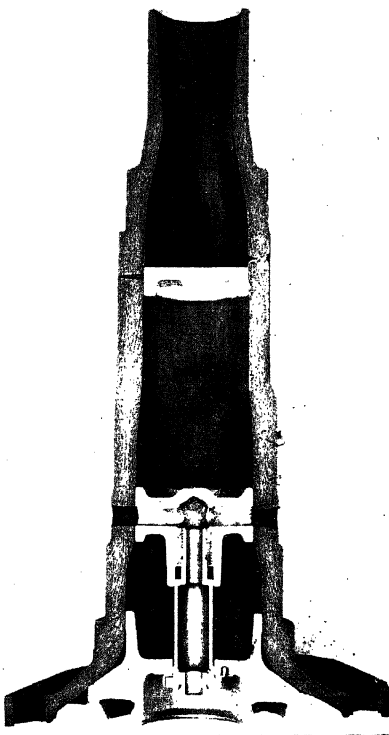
Further section of Bramo Fafnir 323P airscrew shaft.
